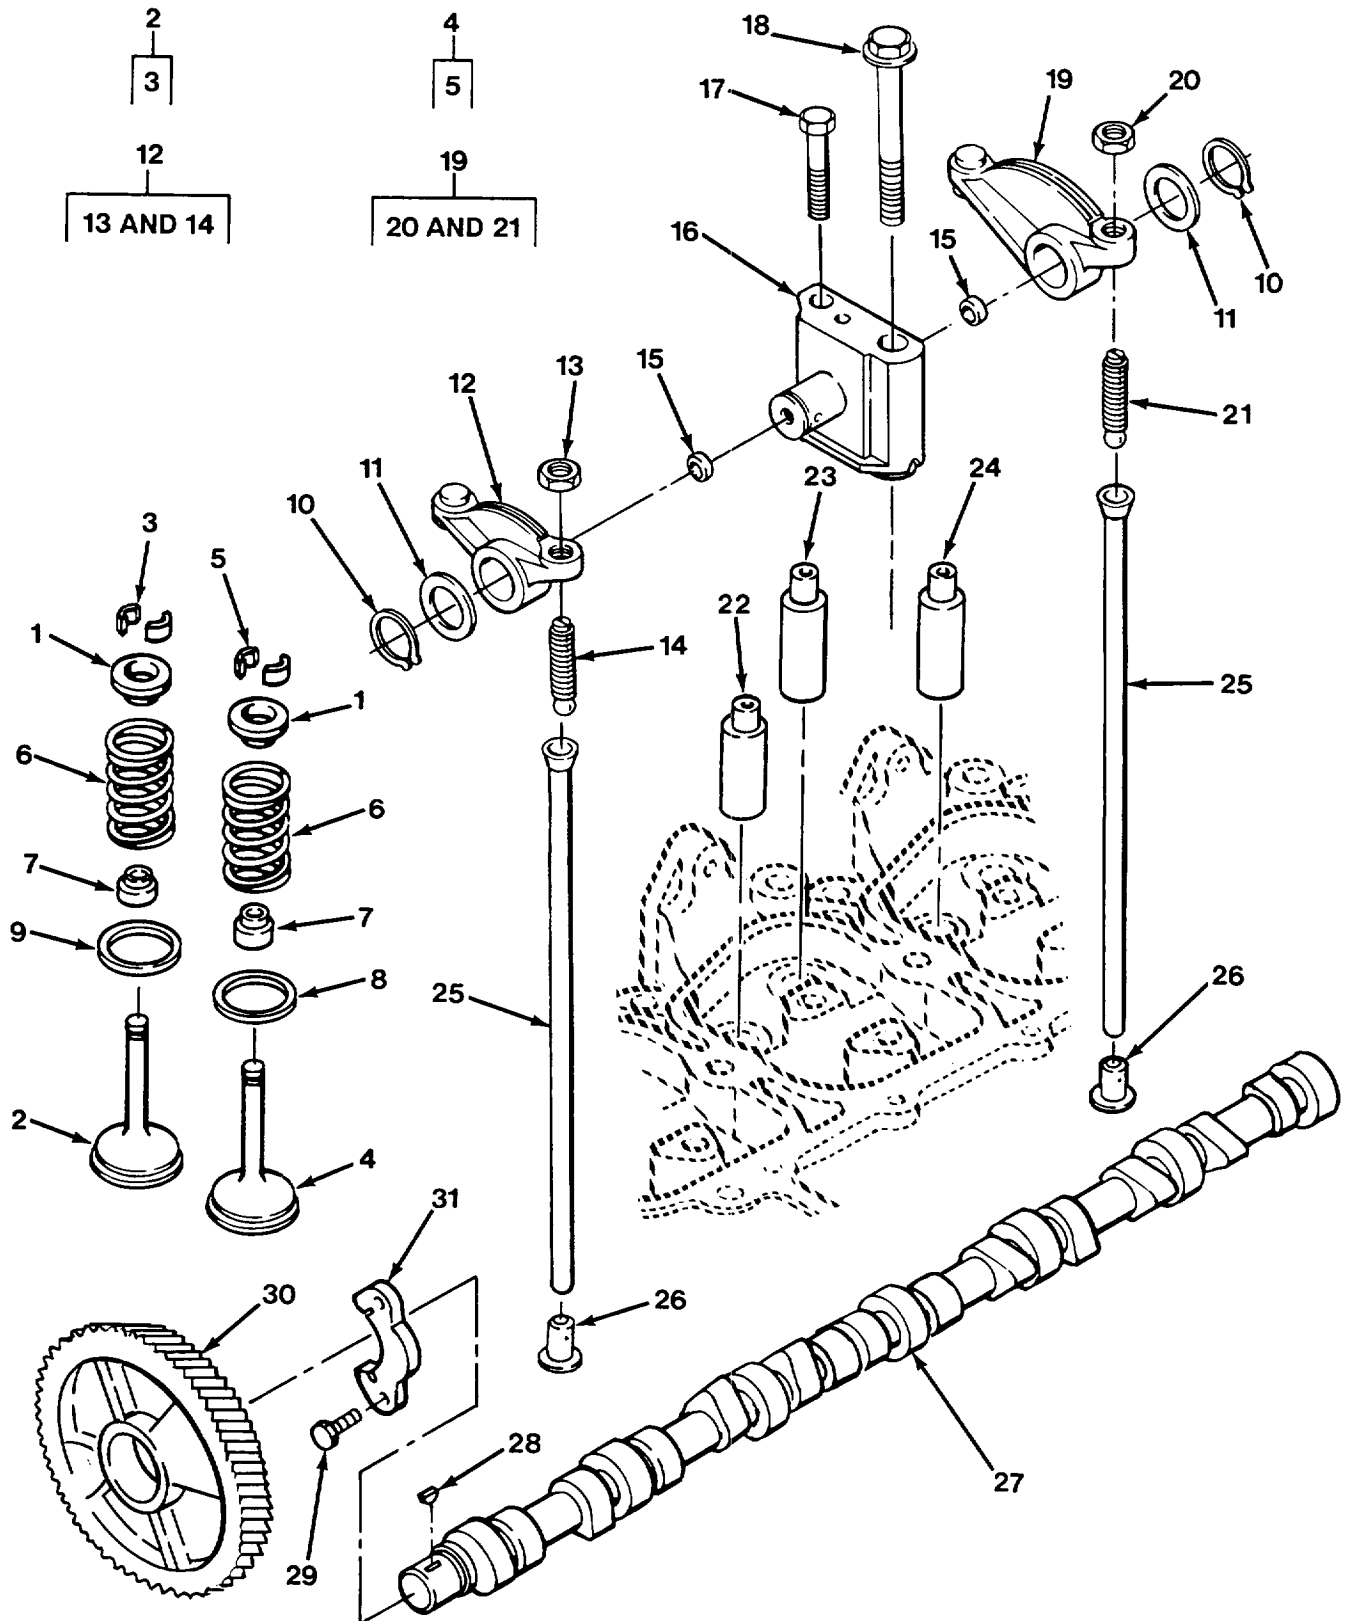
VALVES, ROCKER ARMS, PUSHRODS AND CAMSHAFT
